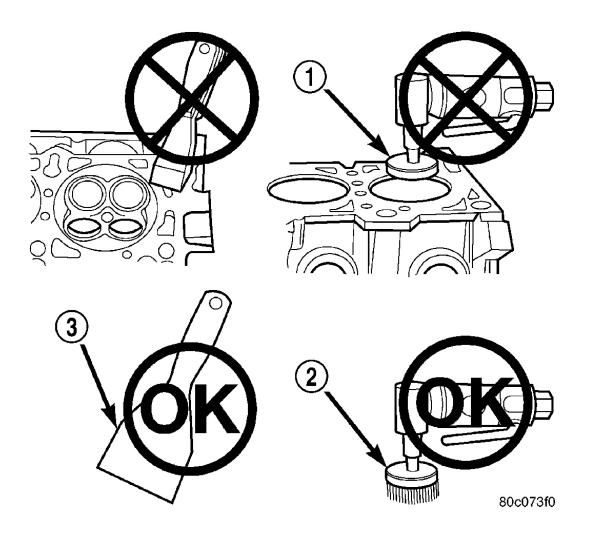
Proper Tool Usage for Surface Preparation Courtesy of CHRYSLER LLC
